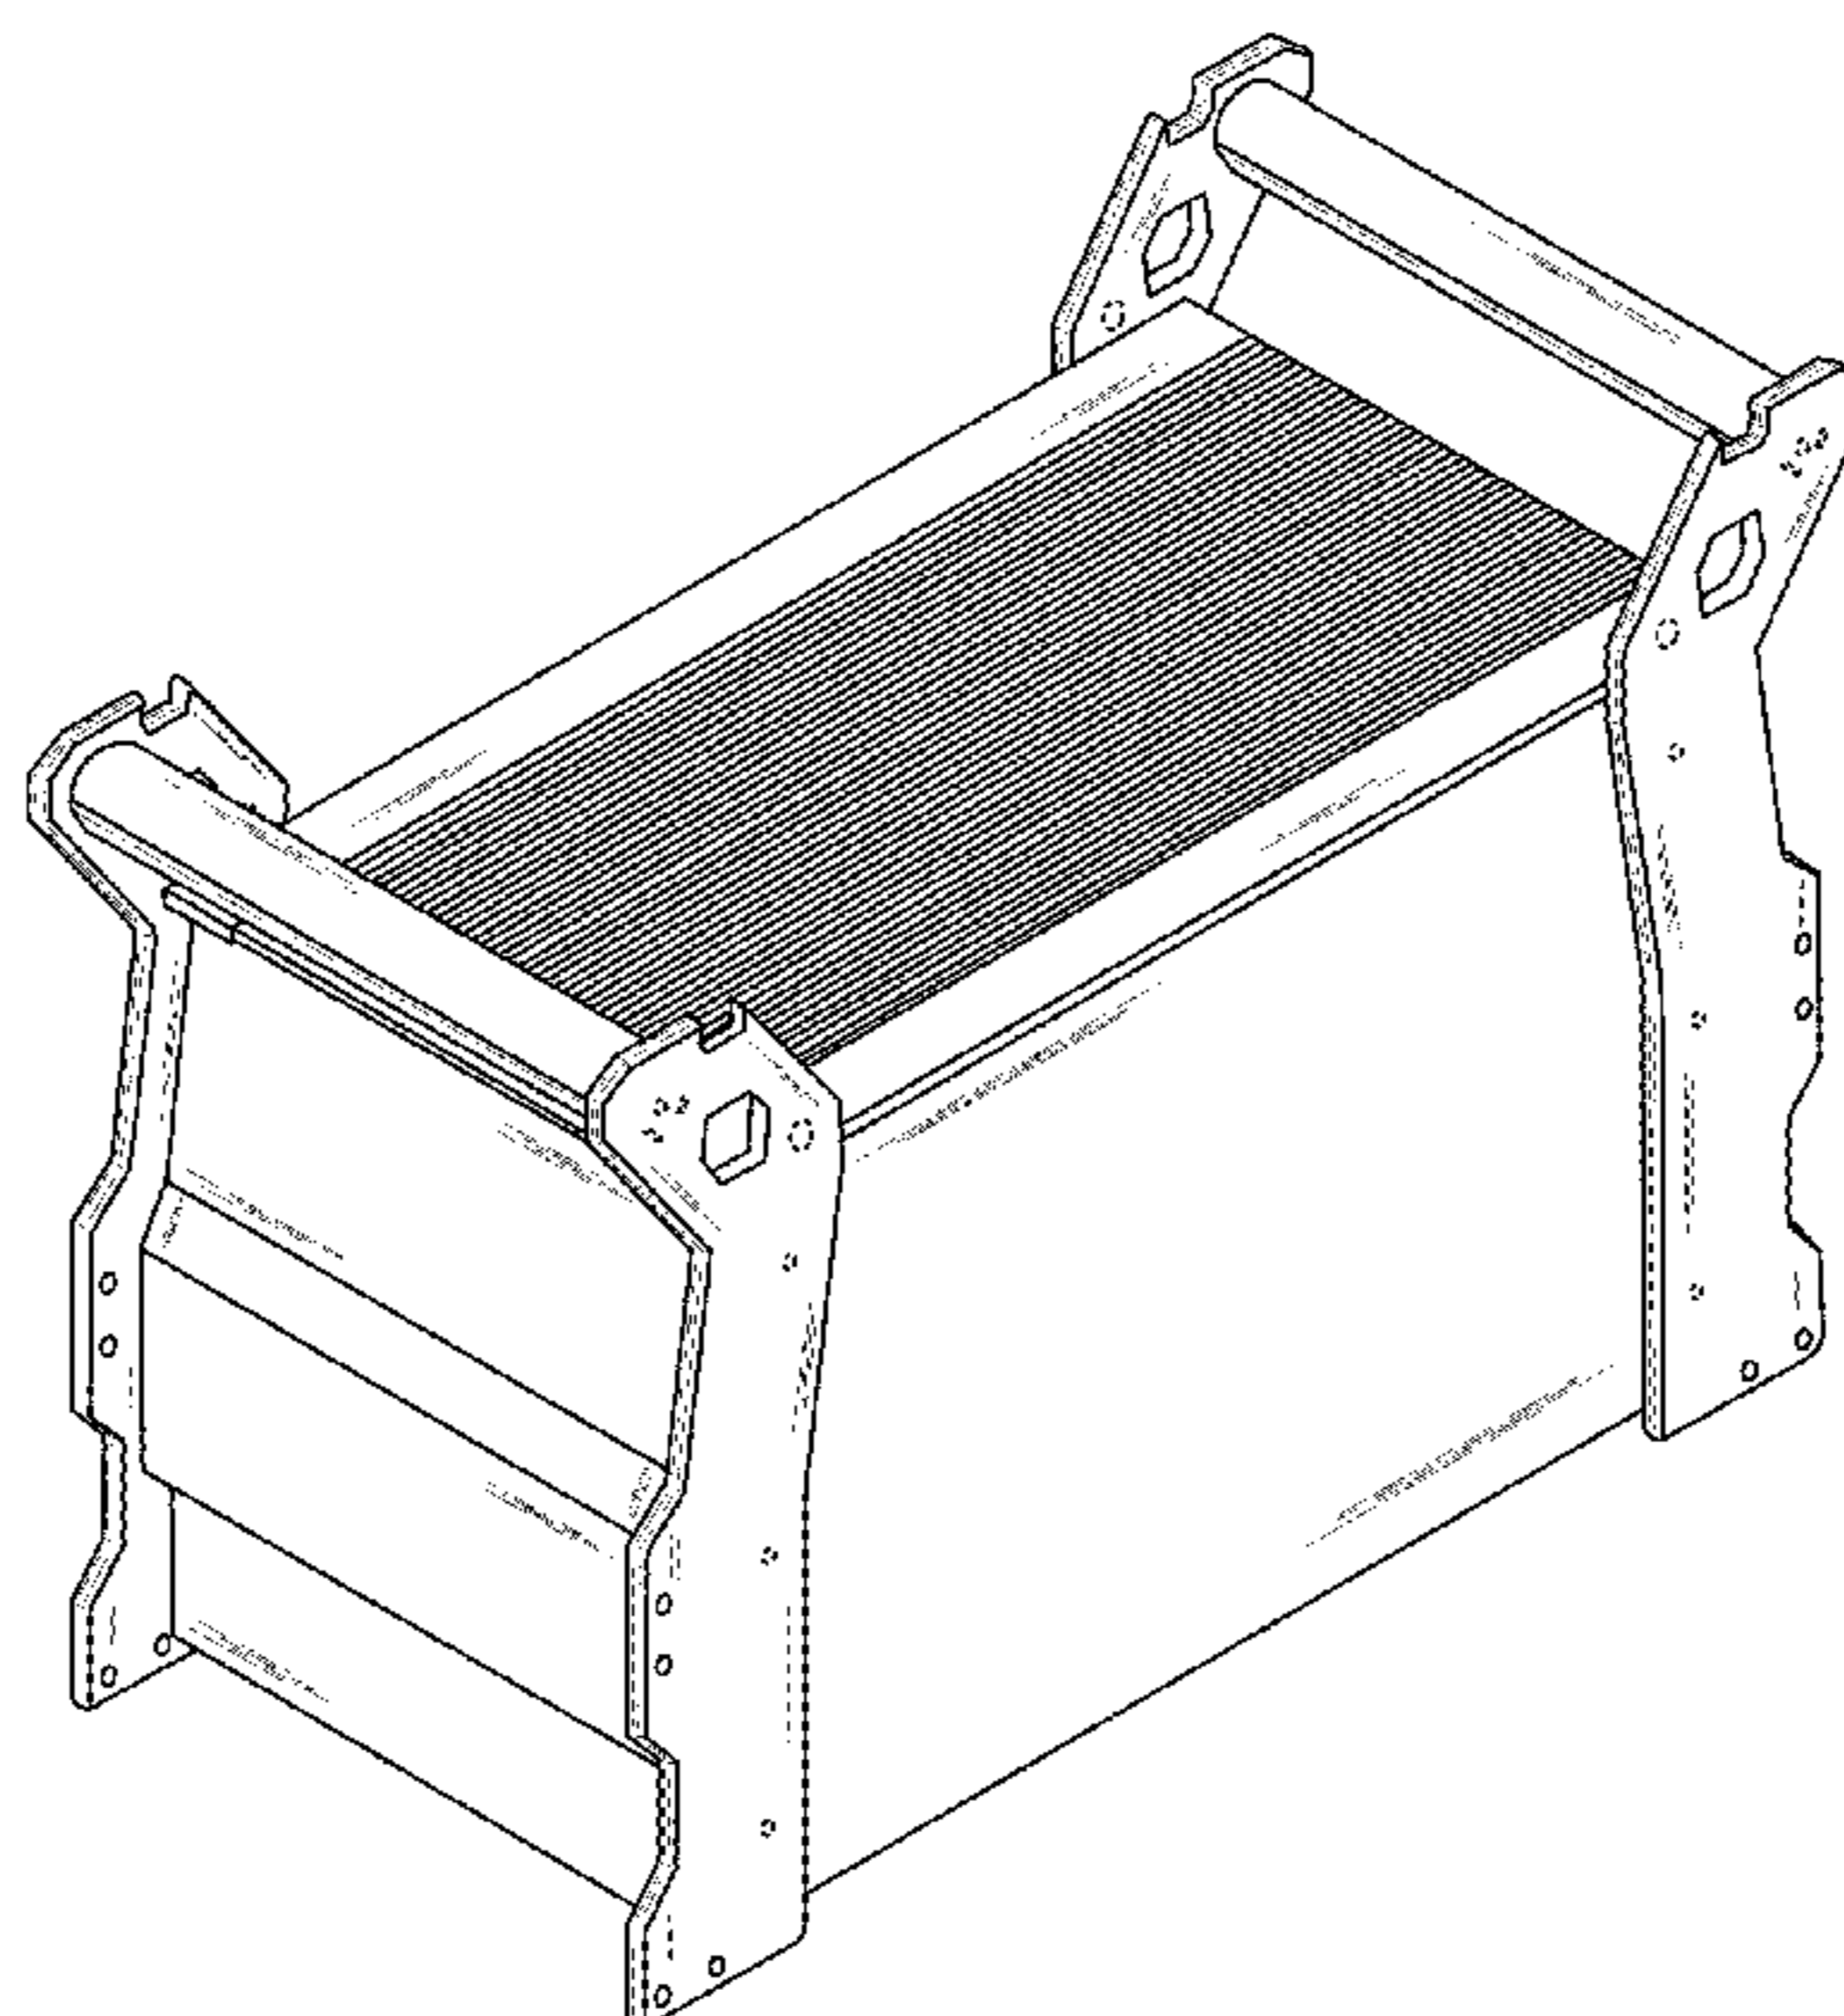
is a front-left side perspective view of an arc producing machine, examples of which are a welder or plasma cutter, showing our new design.
